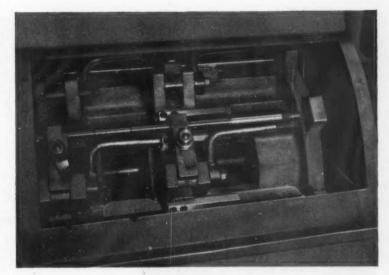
Another Krueger Barnes Machine, with an 8-spindle Head, is Employed for Operations on the Enlarged End of the Mainshaft Bore. Combination Tools are Now Employed and Only Four of the Spindles are Required
